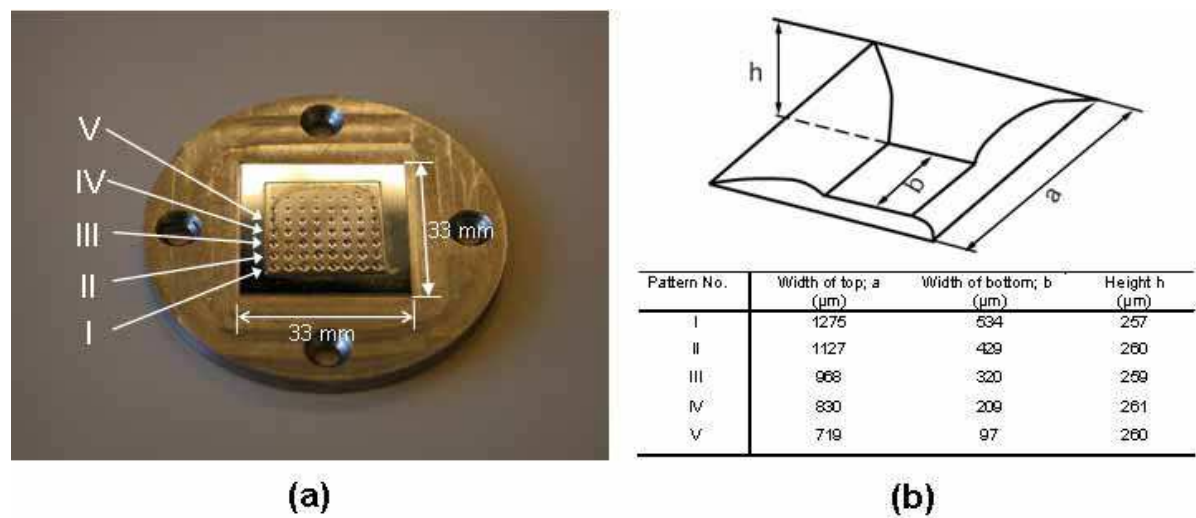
Photograph of electroformed -Ni mold and details of measured pattern size.
